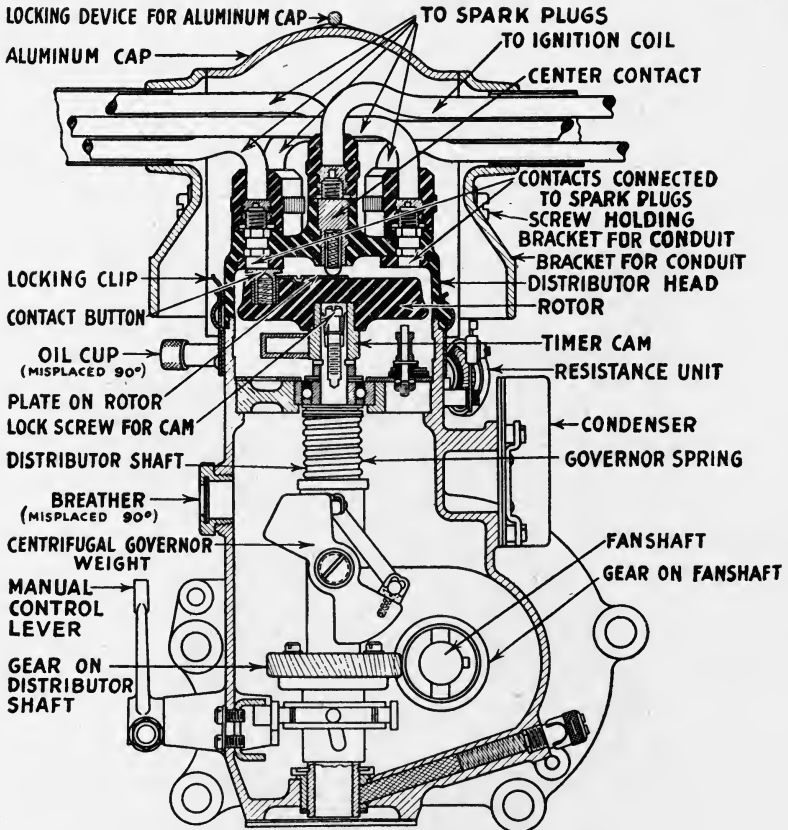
Sectional view of Cadillac Eight ignition unit.
